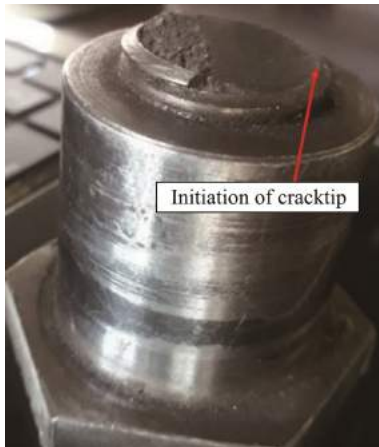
Initiation of the Crack Tip on the Fracture Surface
